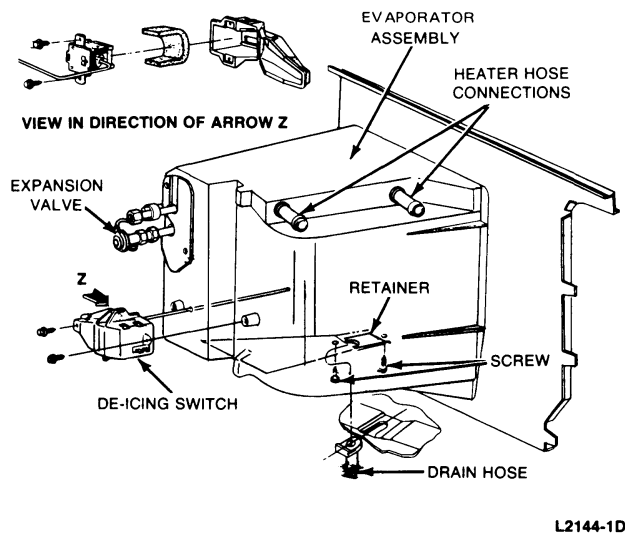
A/C Thermostat (De-Icing Switch) and Drain Hose Installation
